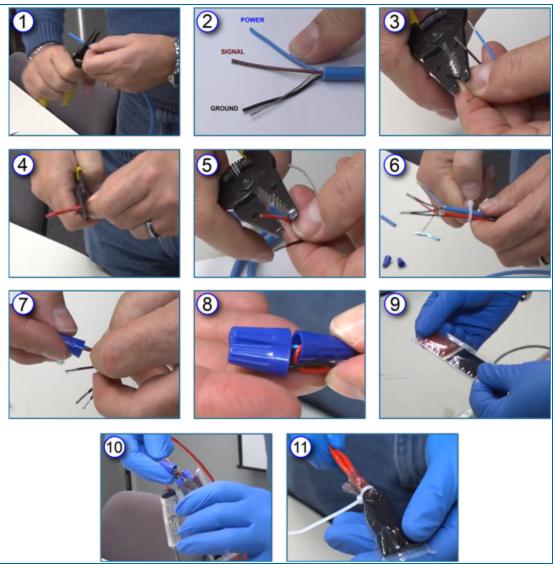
Assembling the Epoxy Sealpack for Waterproof Electrical Connections
